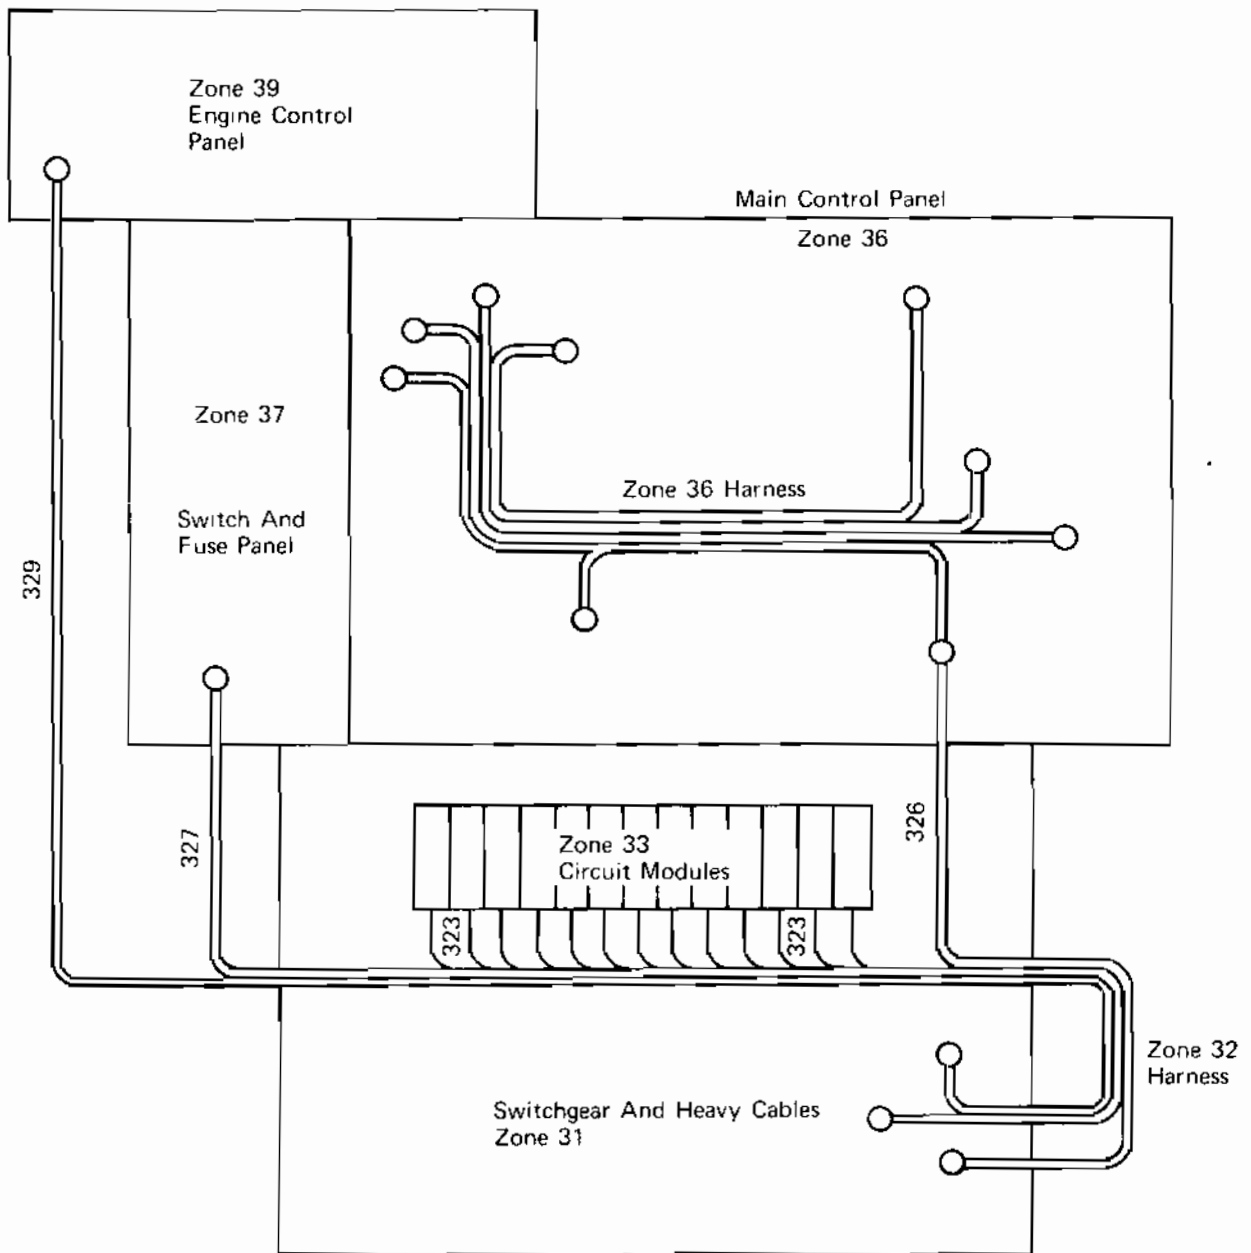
Equipment Location Zones, Electrical Cabinet
